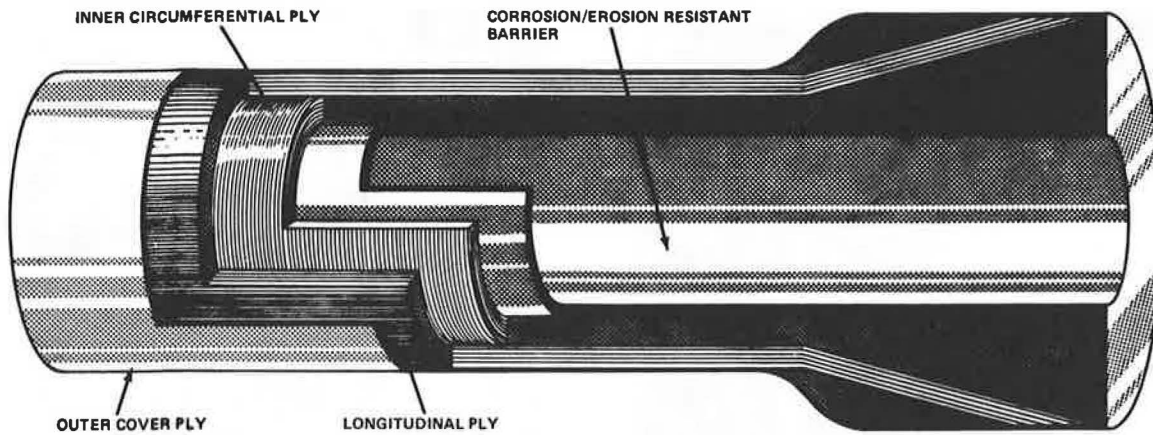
Perspective section view of twined composite pipe joint laminate construction.
